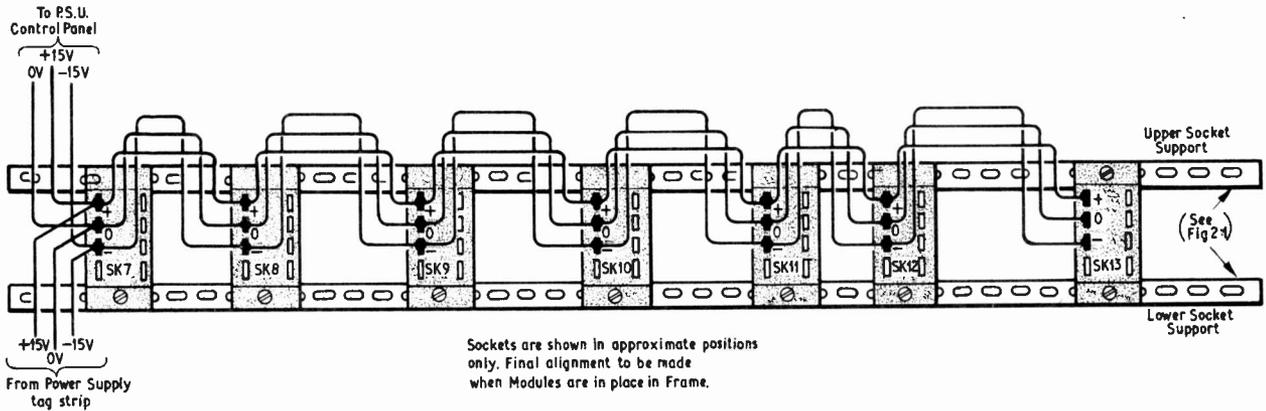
Socket arrangement and wiring on connector mounting rails
